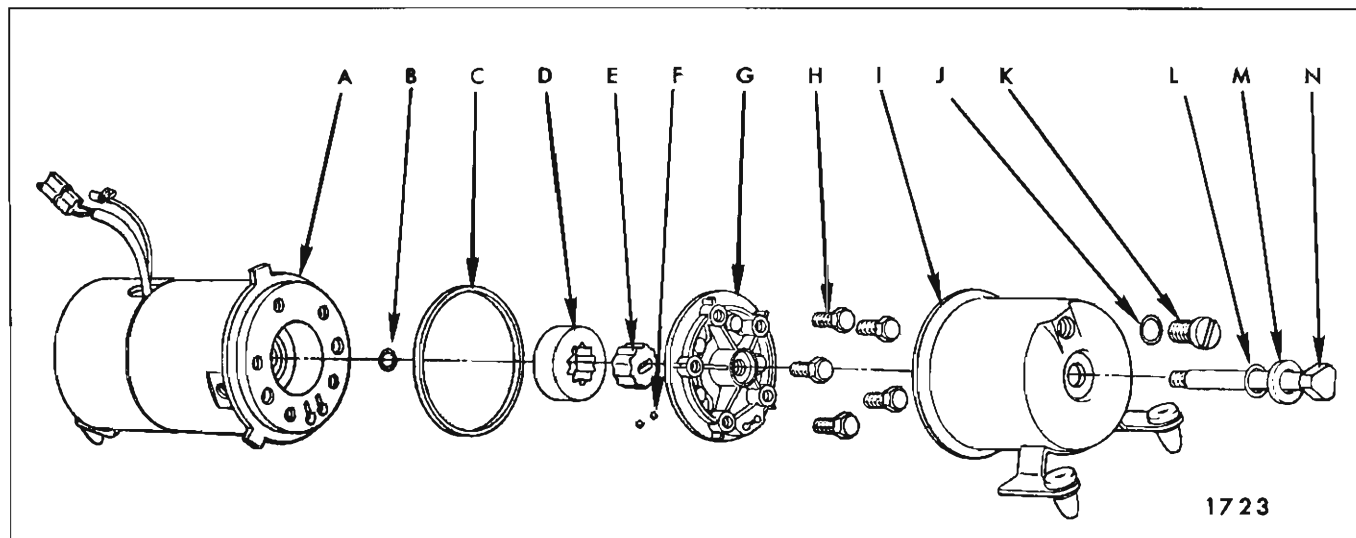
Hydro-Lectric Motor and Pump Disassembled
